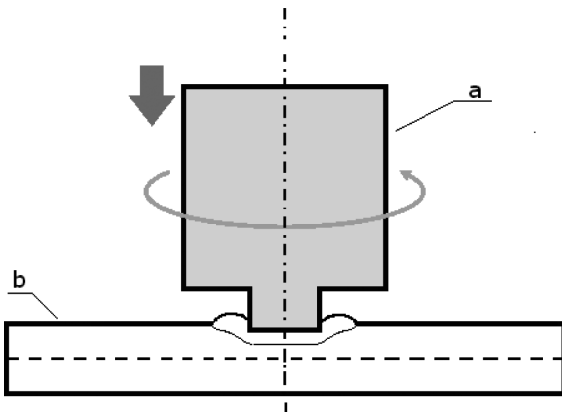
Scheme of friction stir spot welding – plunge phase: a) tool, b) welded materials
